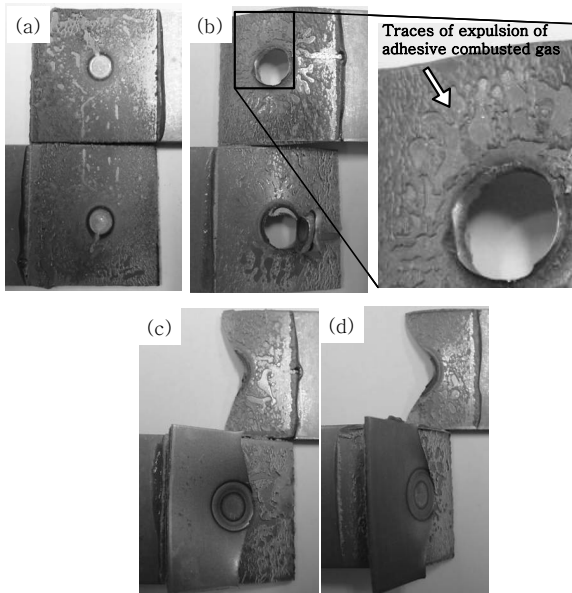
Fracture mode images of Weld-bond with nugget diameter of (a) 4.0mm (b) 5.0mm (c) 6.0mm and (d) 7.0mm
